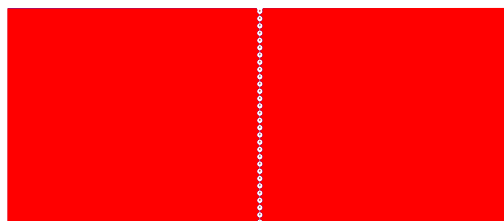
Layout of the boards for mechanical testing with 50 % perforation holes-based approach.
